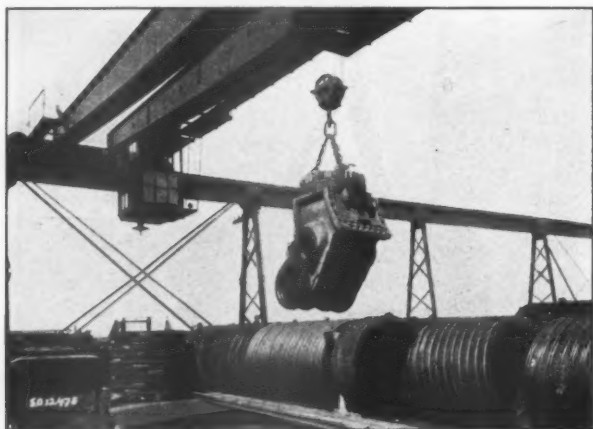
MAGNET LIFTING LOCOMOTIVE SADDLE CASTING
